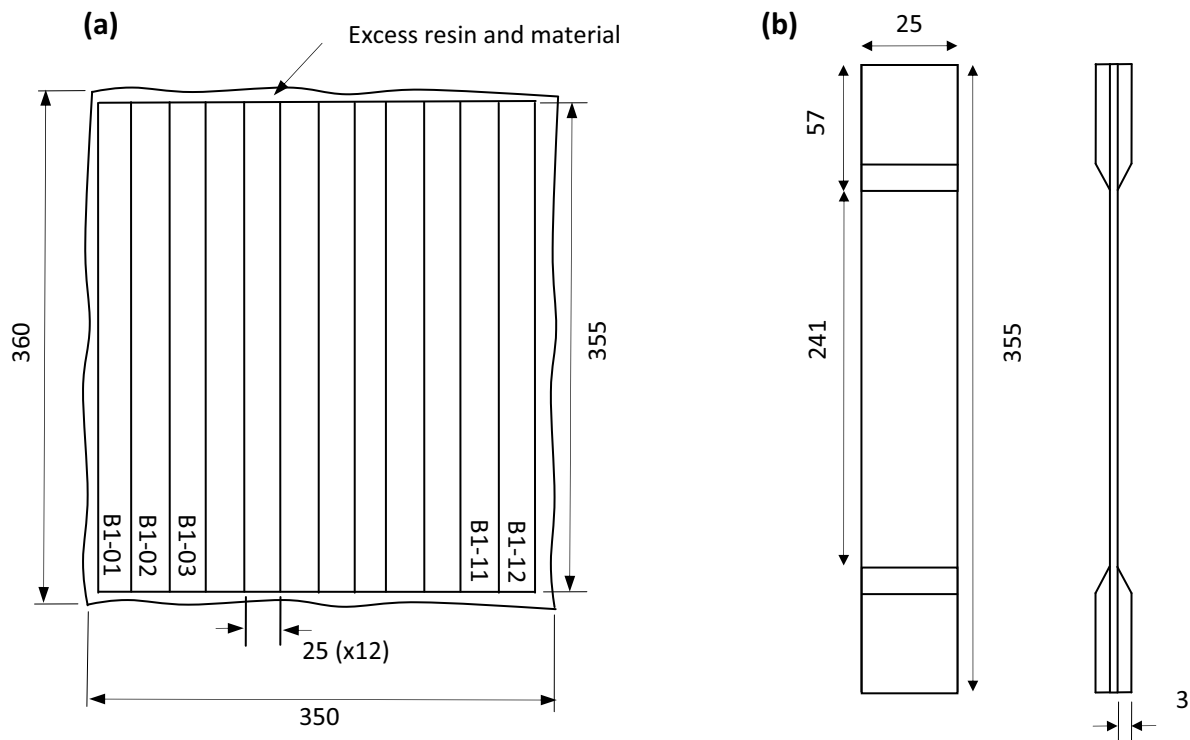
Sketch of braided composite (a) panel cutting pattern, (b) specimen and end tab geometry (all dimensions shown are in mm).
